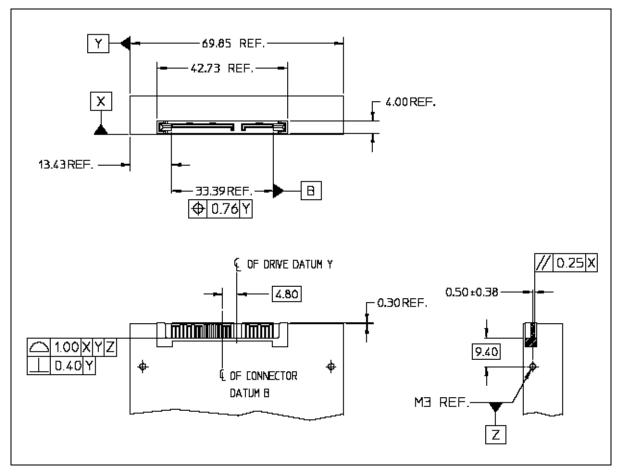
Device plug connector location on 2.5 inch side mounted device
